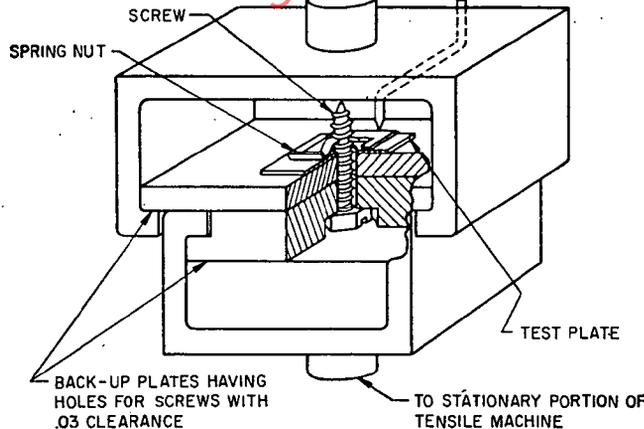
TYPICAL TENSILE TEST FIXTURE
